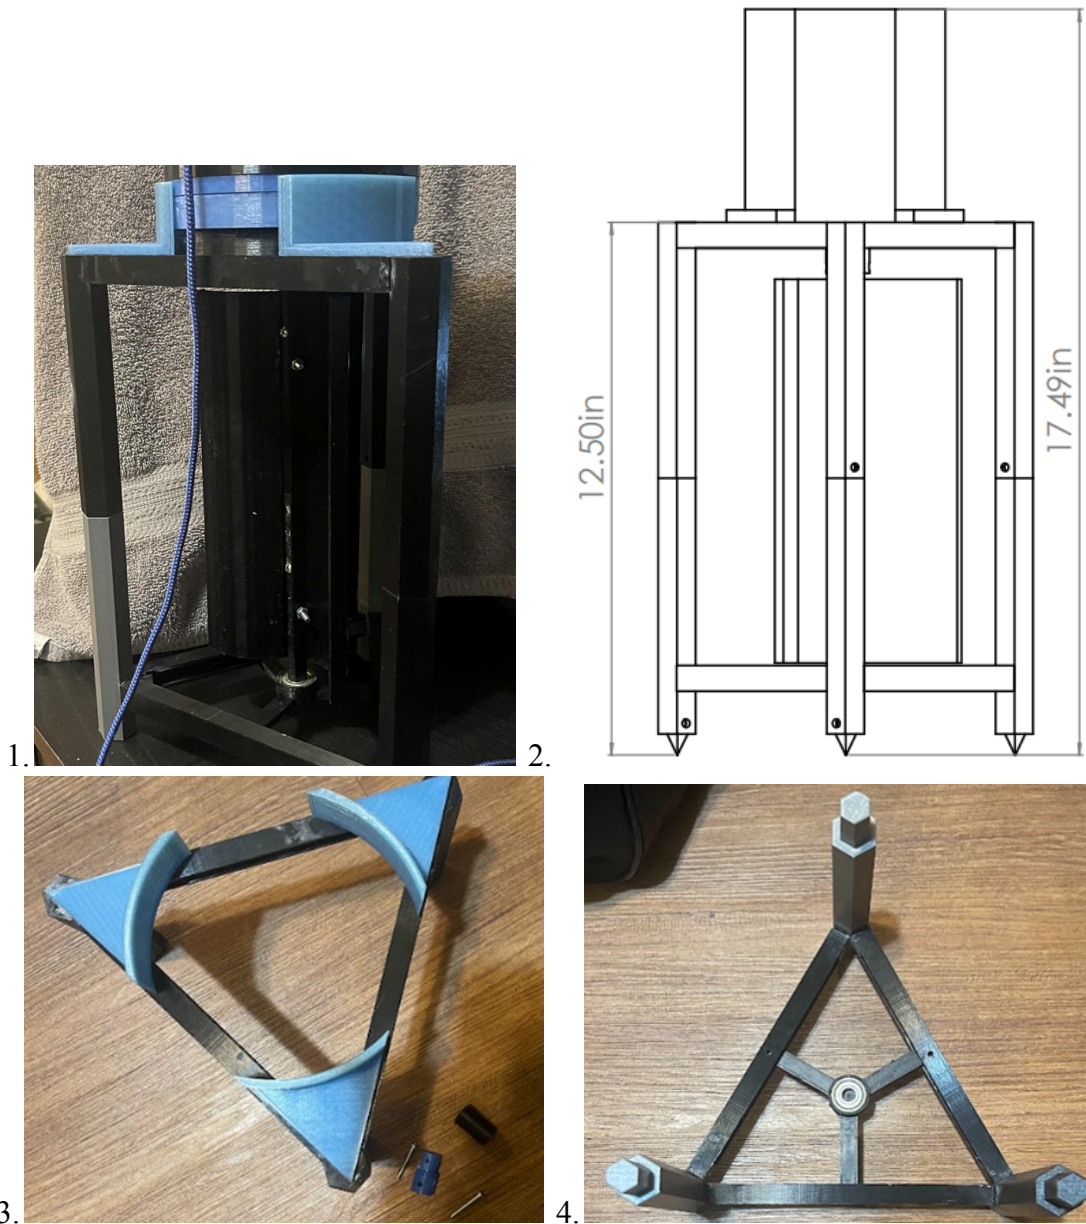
1. Real picture of frame with square blades, 2. Dimensions of the complete frame with hooks, 3. Disassemble the top part of the frame. 4. Disassemble the bottom part of the frame.
